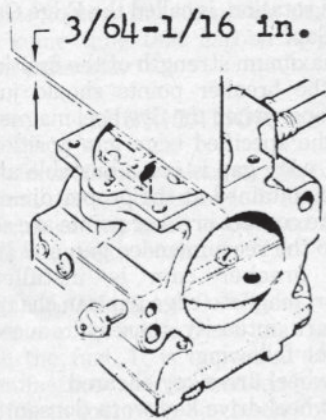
Diaphragm lever on Walbro WB carburetor should be 3/64-1/16 inch from carburetor body.
